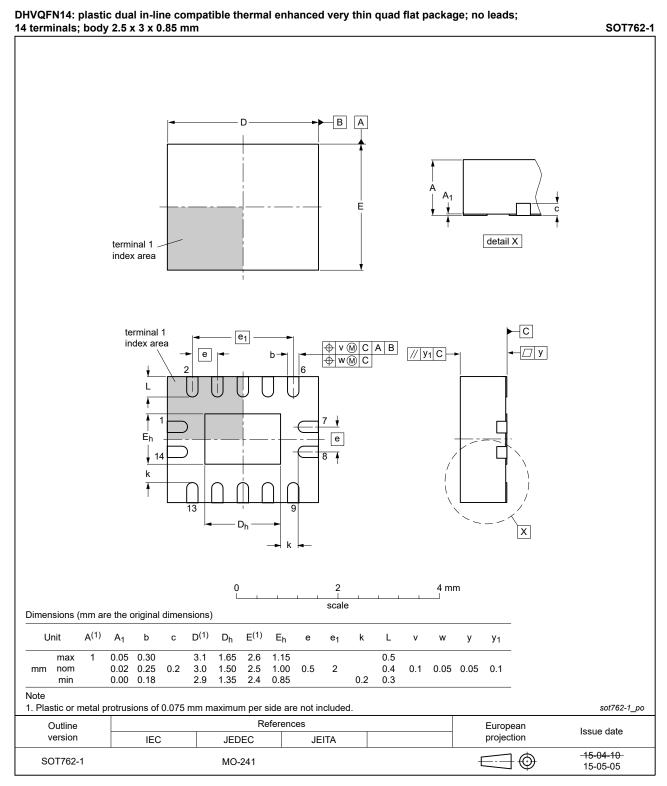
Package outline SOT762-1 (DHVQFN14)
